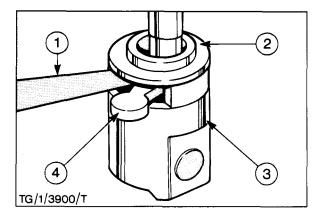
Checking Plunger Arm Clearance 1. Feeler Gauge
